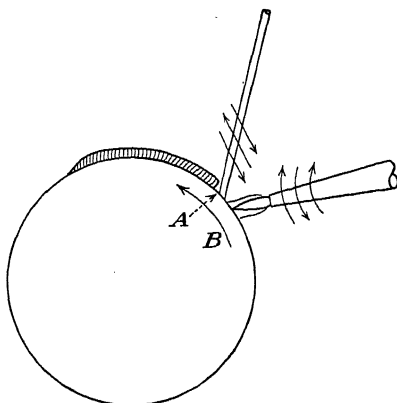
Rolling Lindeweld. A, position of puddle; B, direction of pipe movement.
